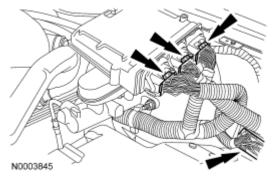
PCM Electrical Connectors Courtesy of FORD MOTOR CO.
